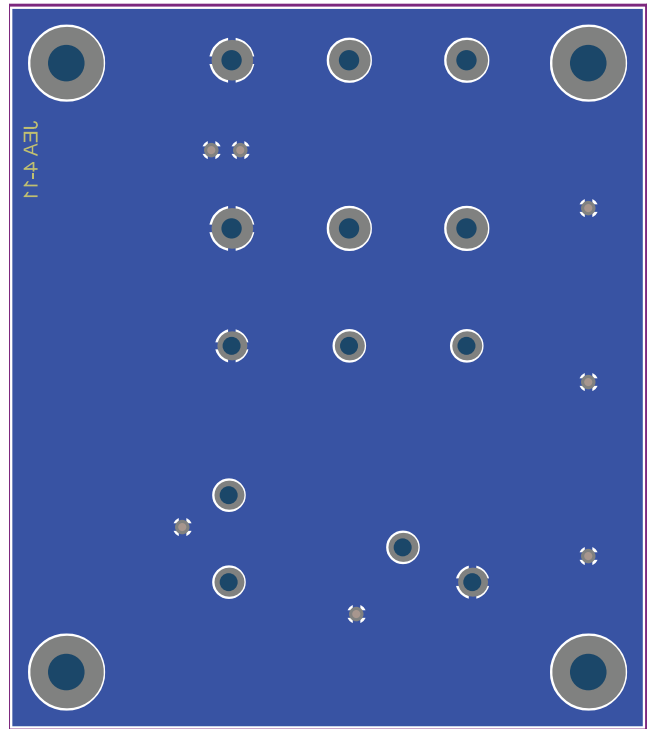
MAX34564/MAX34565 EV Kit PCB Bottom
